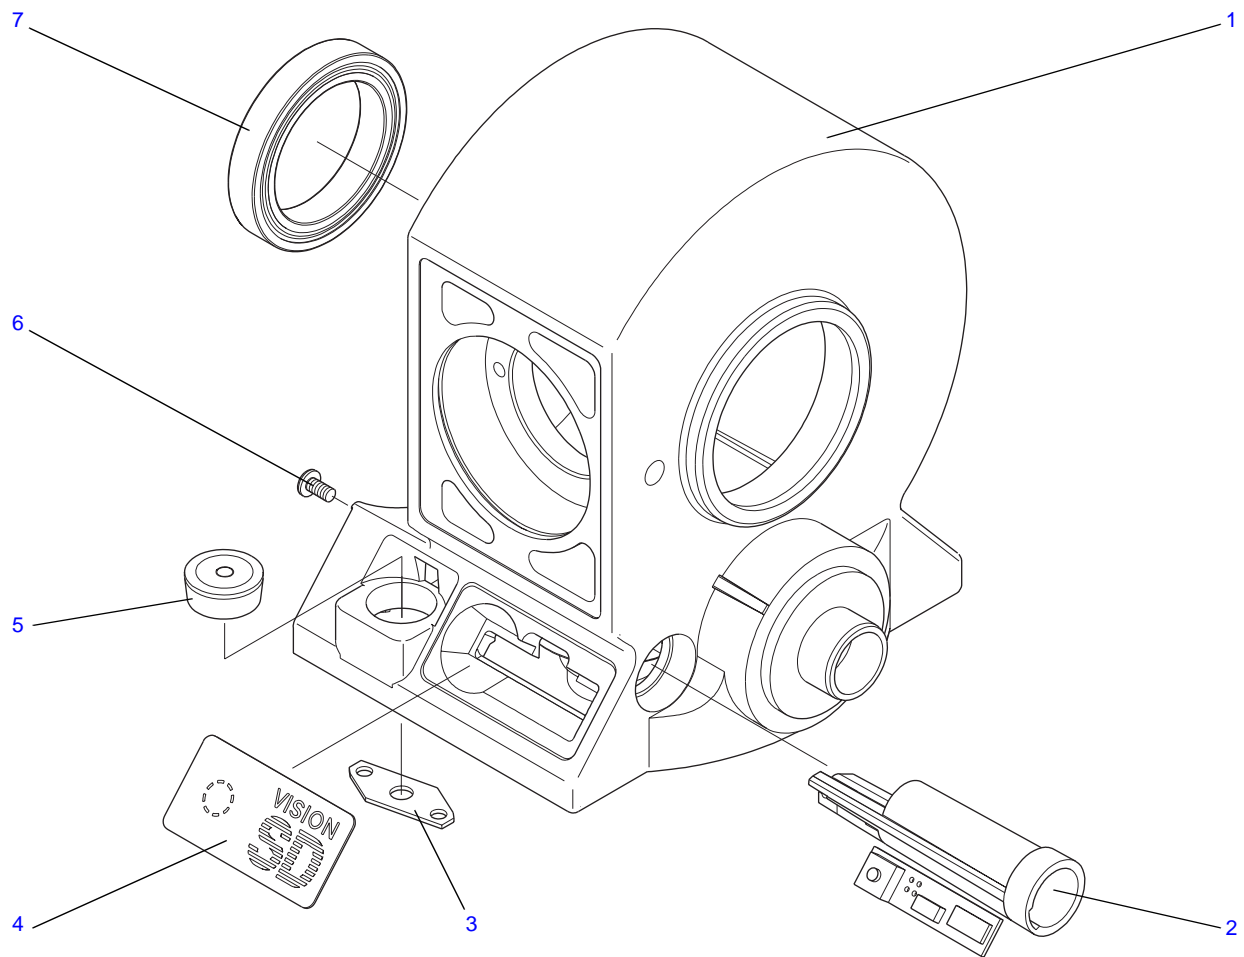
Vision SD12 Pan and Tilt Head - Tilt Assembly
